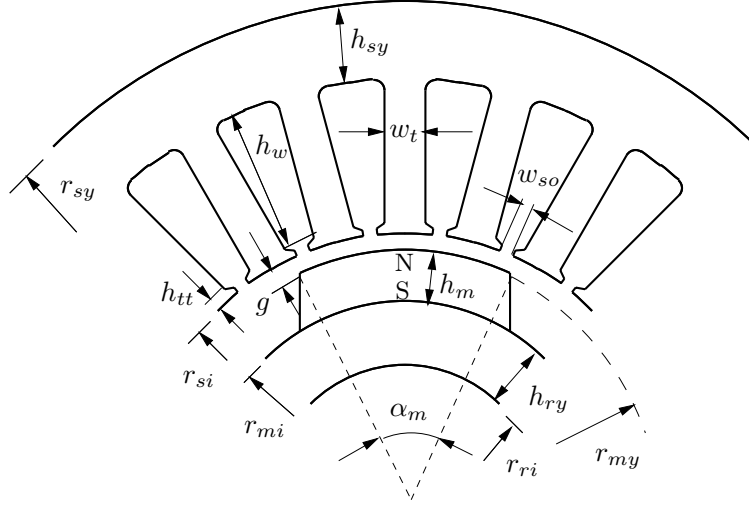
The dimensions of the machine. l_{stack} is the active length of the machine.
